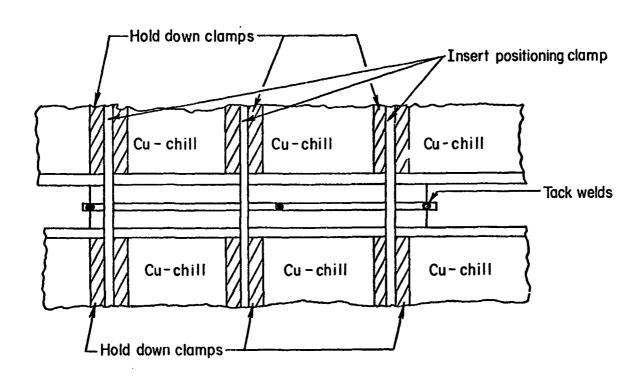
JOINT CONFIGURATION AND TOOLING FOR PRODUCTION OF THE WELDMENTS
